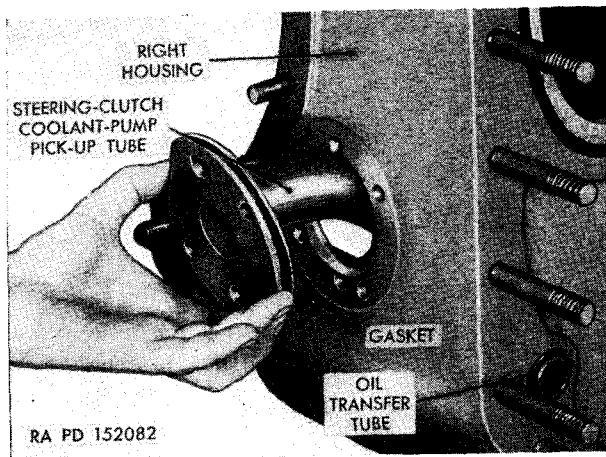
Removing or installing steering-clutch-coolant-pump pick-up tube.
